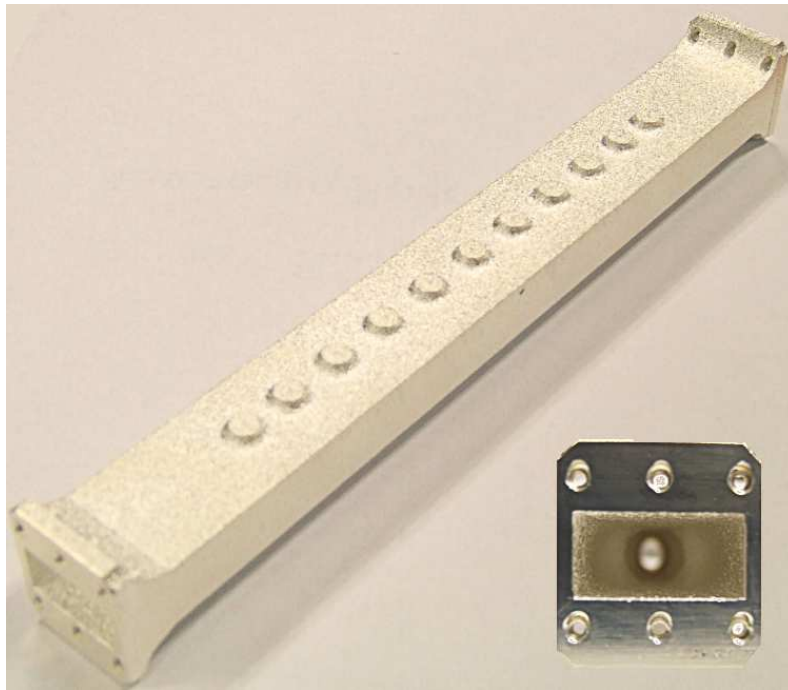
Manufactured single piece part aluminum alloy shaped filter as received from the manufacturer.
